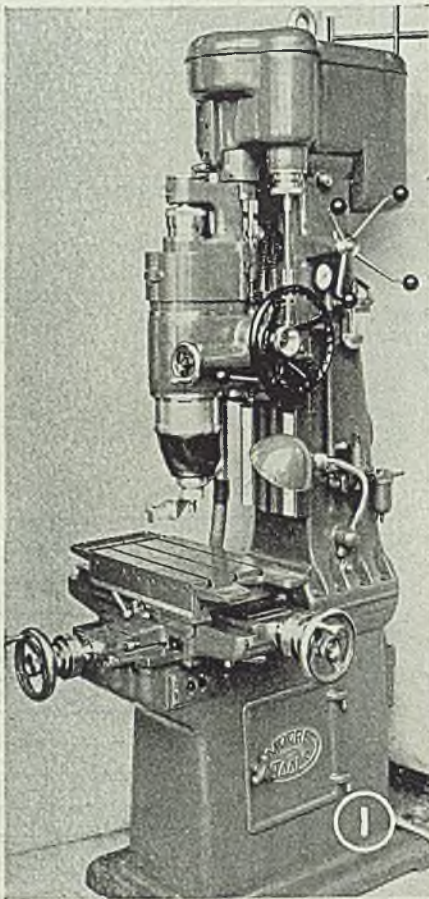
General view of jig grinder, minus its fixtures for gear job, showing location of hole locating, sizing and operational controls
